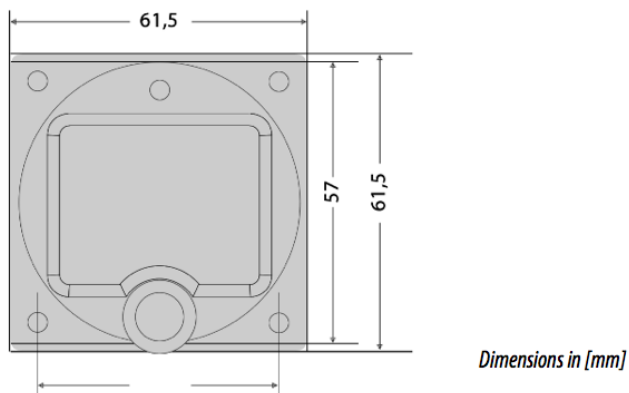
Mechanical Dimensions 57mm panelmount
